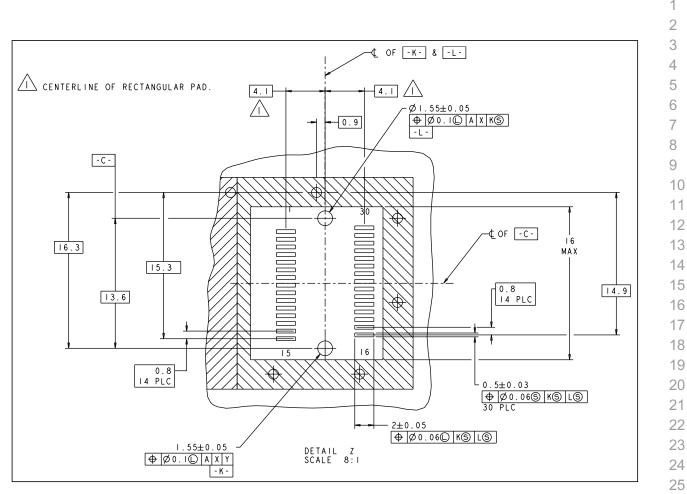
XFP Detail Host Board Mechanical Layout, Detail Z
